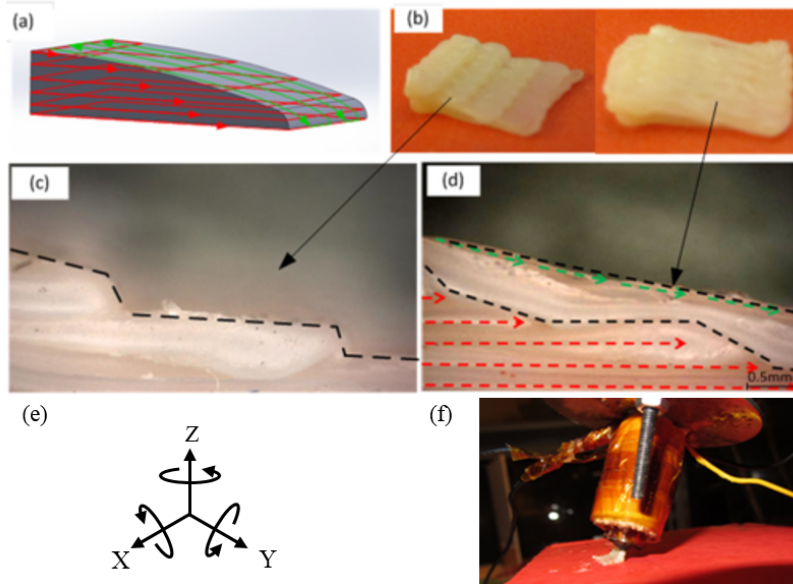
Improved surface finish using multidirectional AM: (a) Planned tool paths, (b) the part build using two methods, (c) side view of the steps caused by standard horizontal layers, (d) side view of the surface smoothed by printing conformal layers along the contour of the surface. (e) The 6 DOF along which this mechanism can move allowing (f) the nozzle to tilt away from vertical. From [105].
